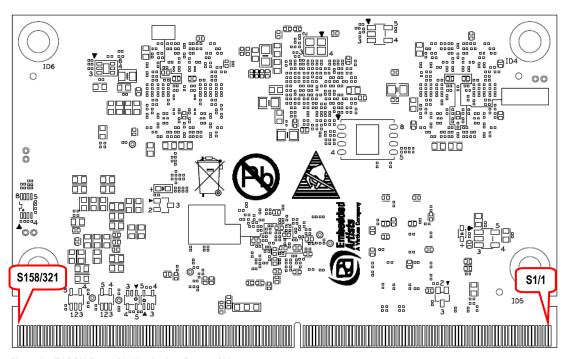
EACOM Board Pin Numbering, Bottom Side
